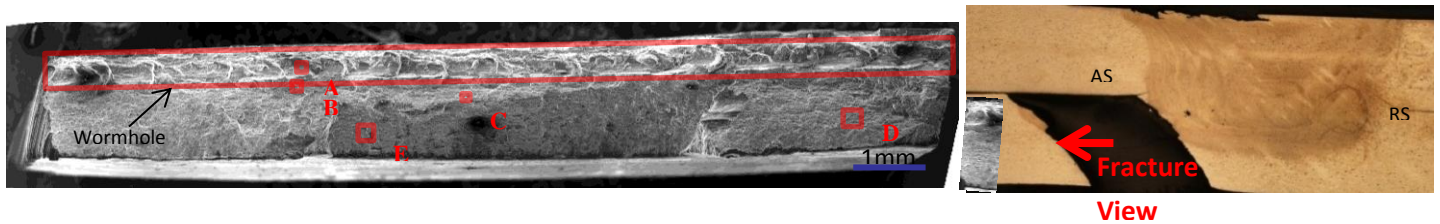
Panoramagram of fracture surface #3764
